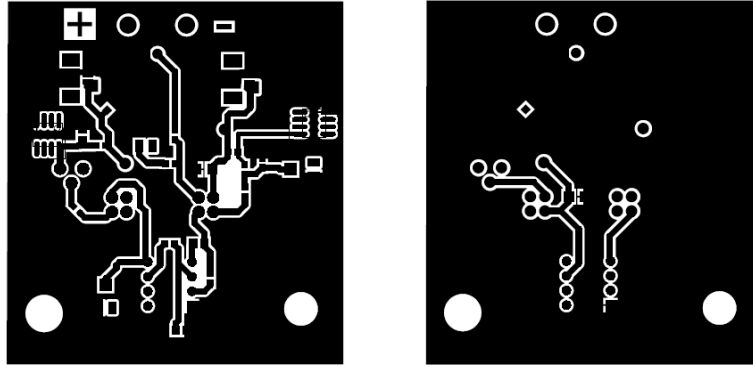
The printed circuit board layouts used in testing the optocoupler. The top layer is shown on the left and the bottom layer on the right.
